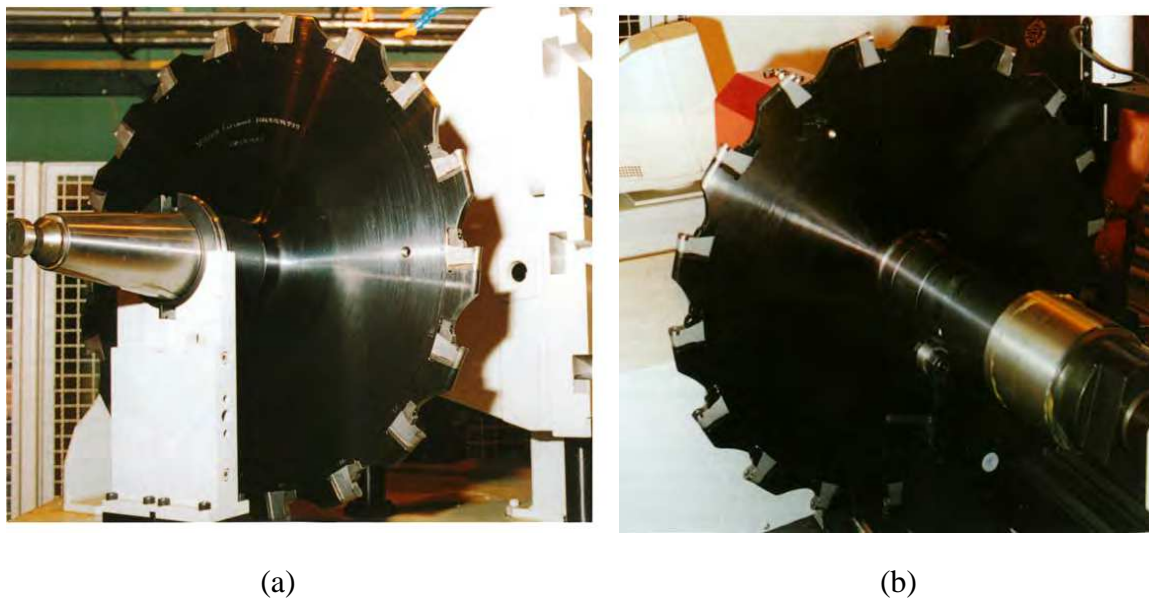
Cutting inserts for large diameter cutters require pre-setting to minimize any run-out: (a) a special-purpose deep-slotting cutter utilized for the production of components for the Eurofighter 9 i.e. Typhoon; (b) deep-slotting cutter insert are pre-set to a 10 micrometers run-out tolerance on the tool-presetting machine
